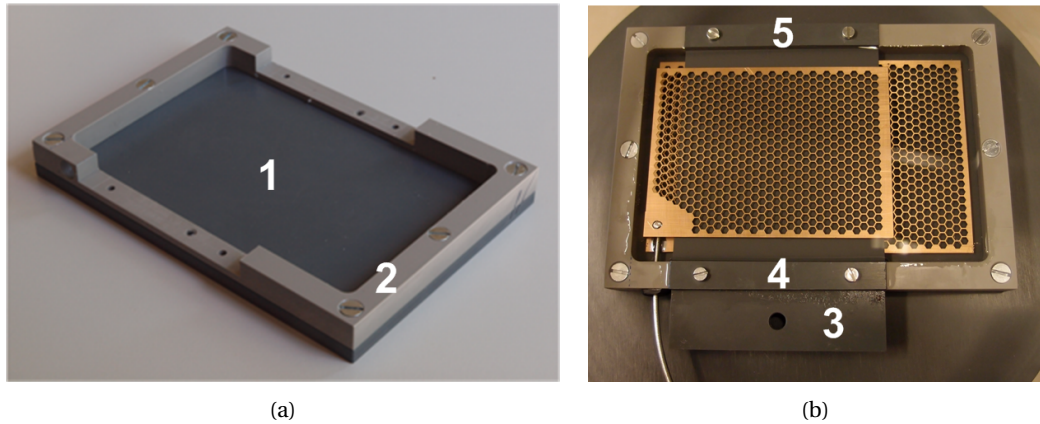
Prototype of the mold used for air-gap PIFA: (a) Bottom plate and frame assembled and (b) Conductive parts of the antenna placed inside the mold.
